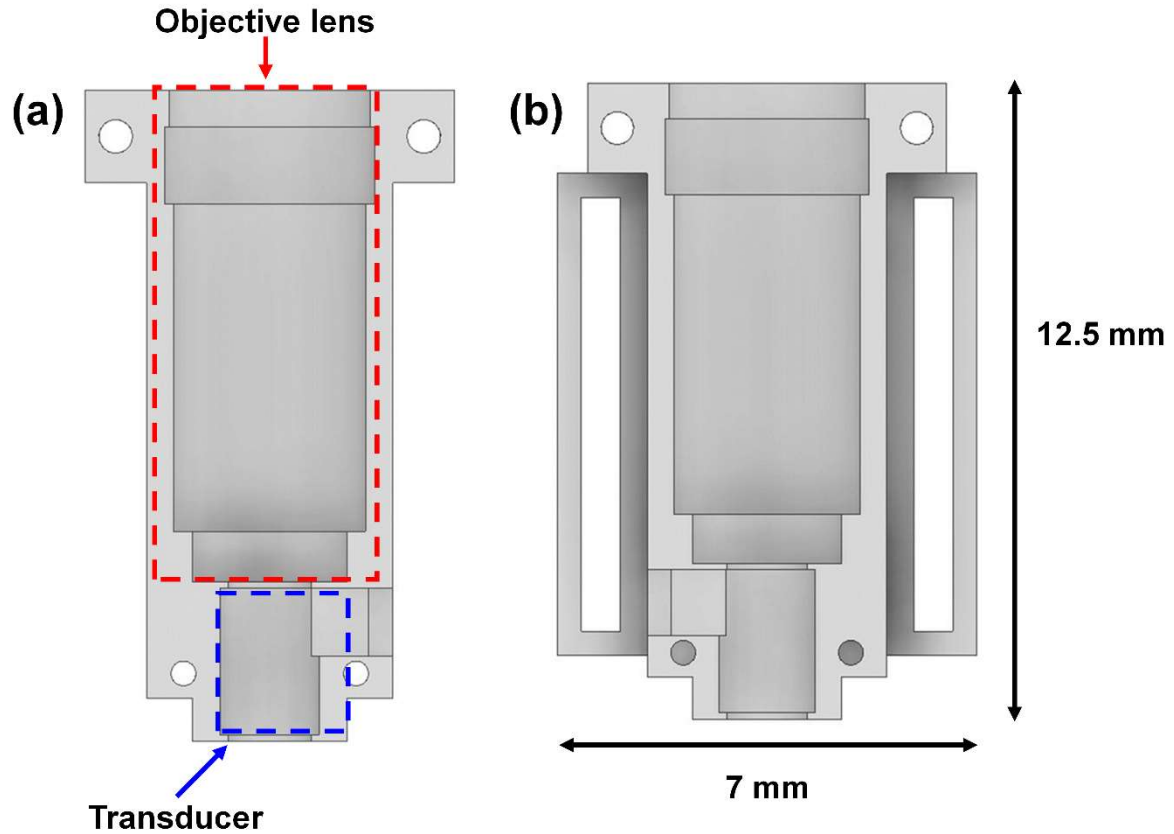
Cross-sectional illustration of the prototype-designed housing. (a) Bottom side of the housing and (b) Top side of the housing.
